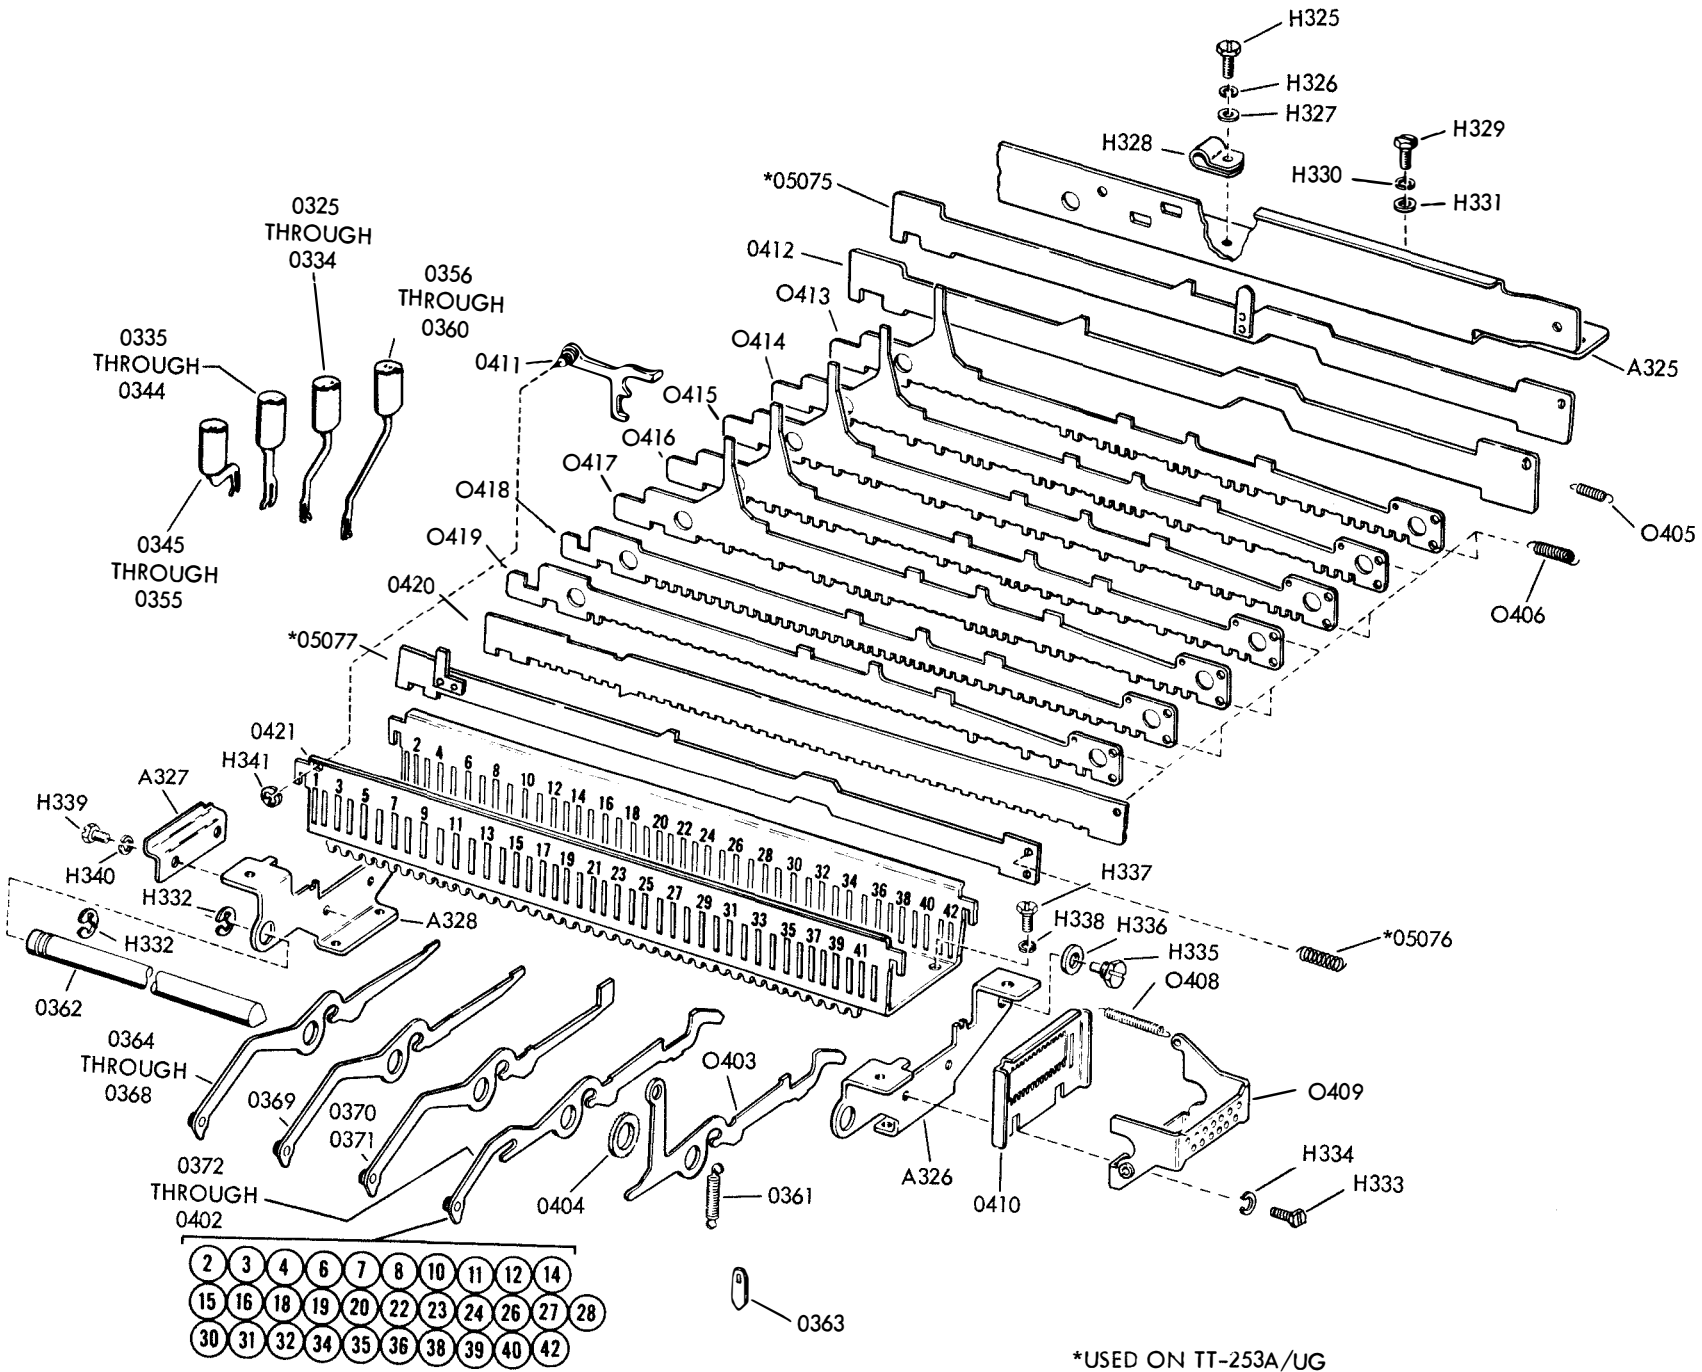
Keyboard - Base, Keyboard Assembly (TT-253/UG, TT-253A/UG and TT-292/UG)
